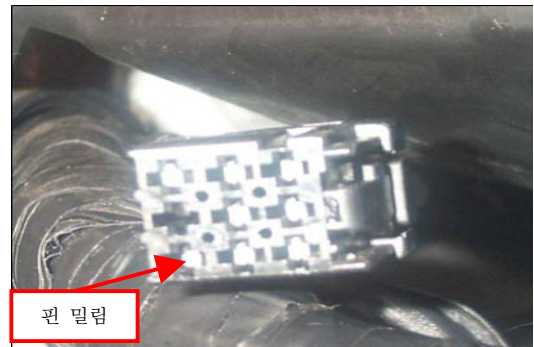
Breakaway shape of connector fin assembled Engine ECU
